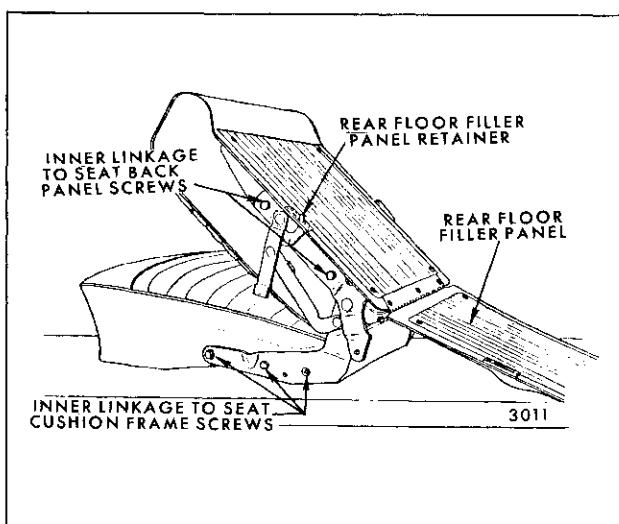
Folding Second Seat Cushion Assembly (Right or Left Side) - "65" Styles
